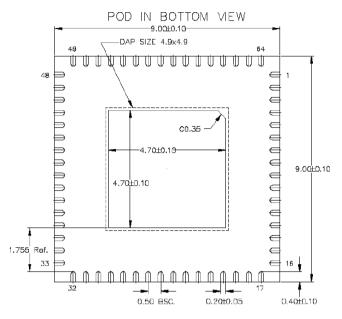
Package outline drawing for the QFN package used in this BLR analysis
